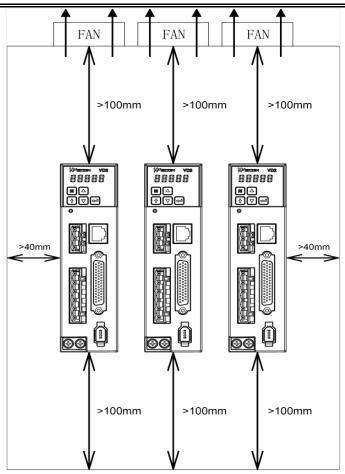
Parallel installation dimensions of multiple VD2A drives
